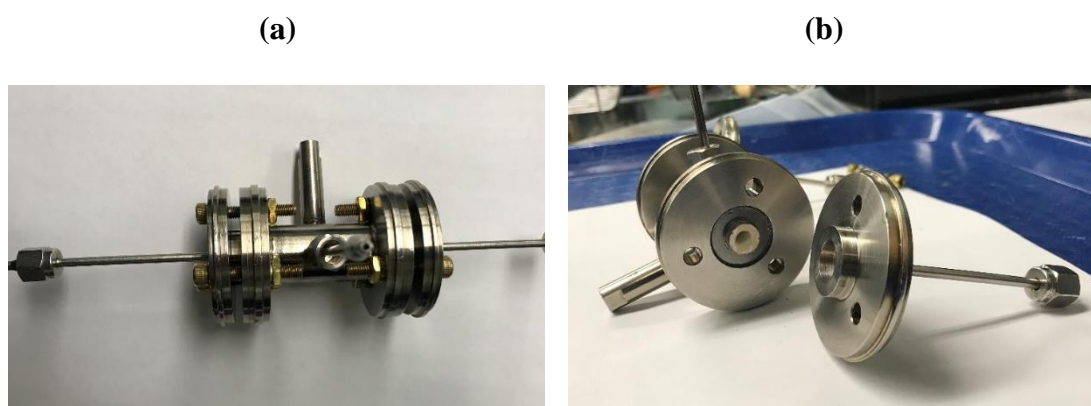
(a) Picture showing the assembled module 3. (b) Picture showing the incorporation of the membrane and gaskets into the membrane module 3, 7.15b (right).
